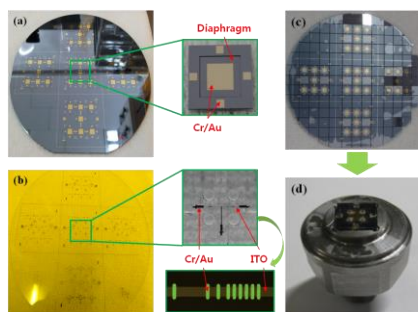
Fabricated devices (a) silicon part (b) glass part (c) anodic bonding (d) pressure sensor bonded with measured jig
